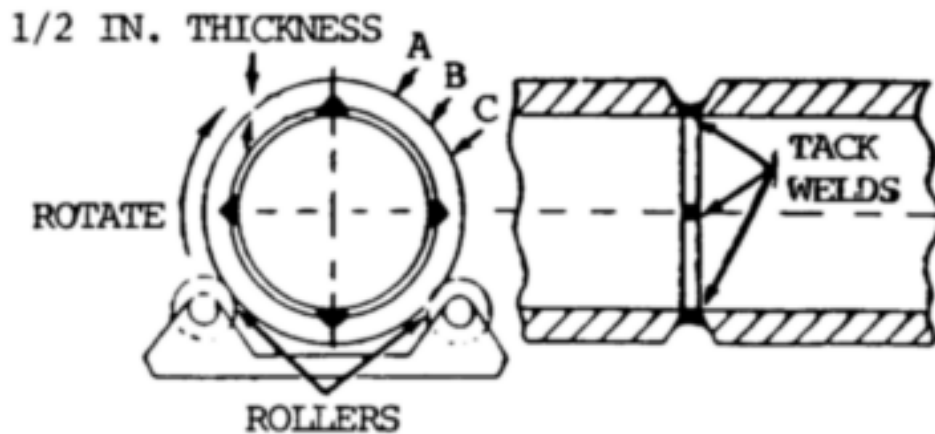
Diagram of tack welded pipe on rollers.
